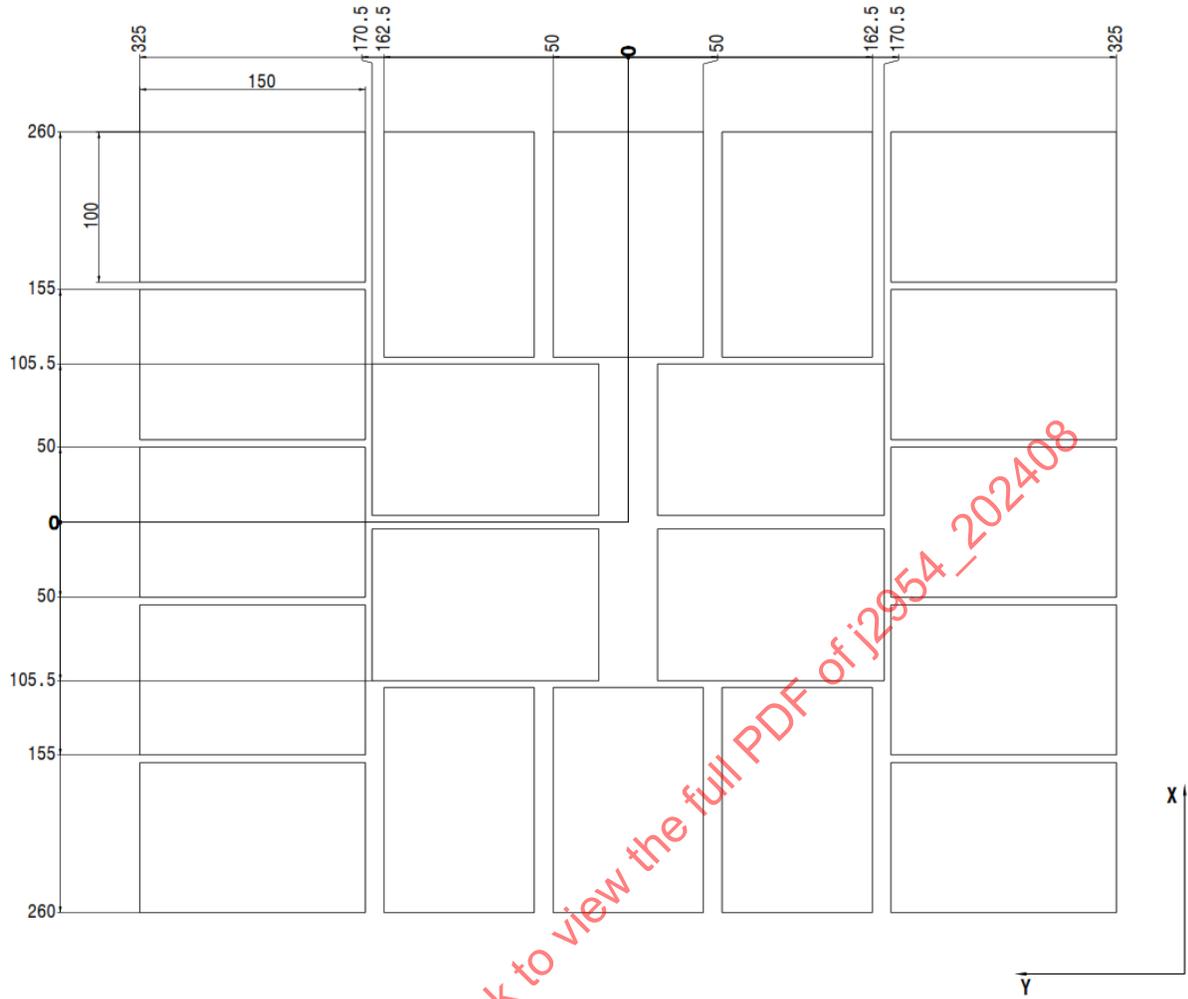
Mechanical dimensions of the example DIPS-Enabled GA
